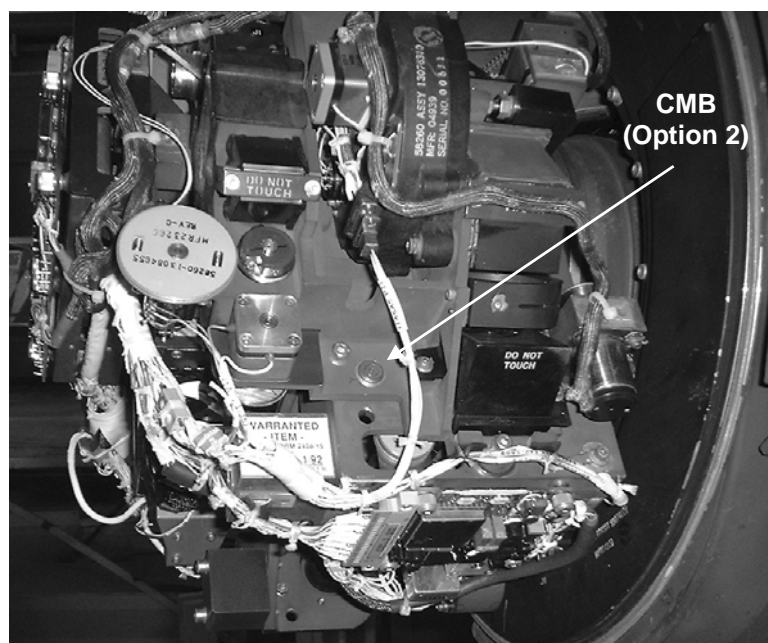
Day Sensor Sub-Assembly (AH-64A/D) with CMB Installed
